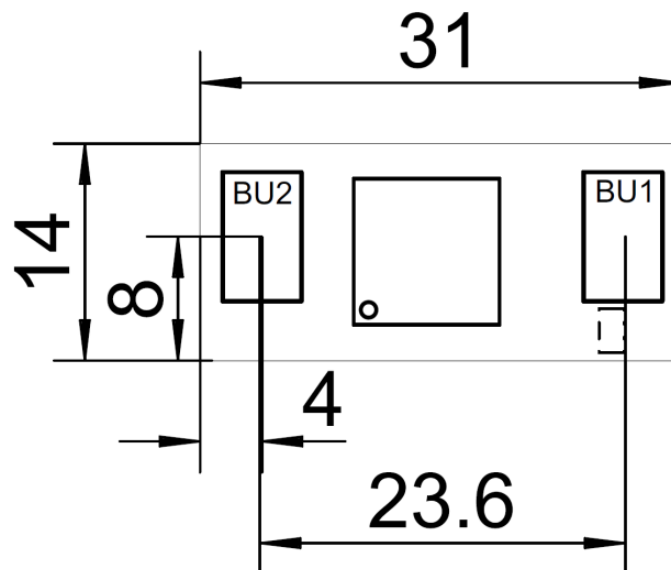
SMARTsat® OEM III Board Physical Dimensions, Bottom View (in mm)
